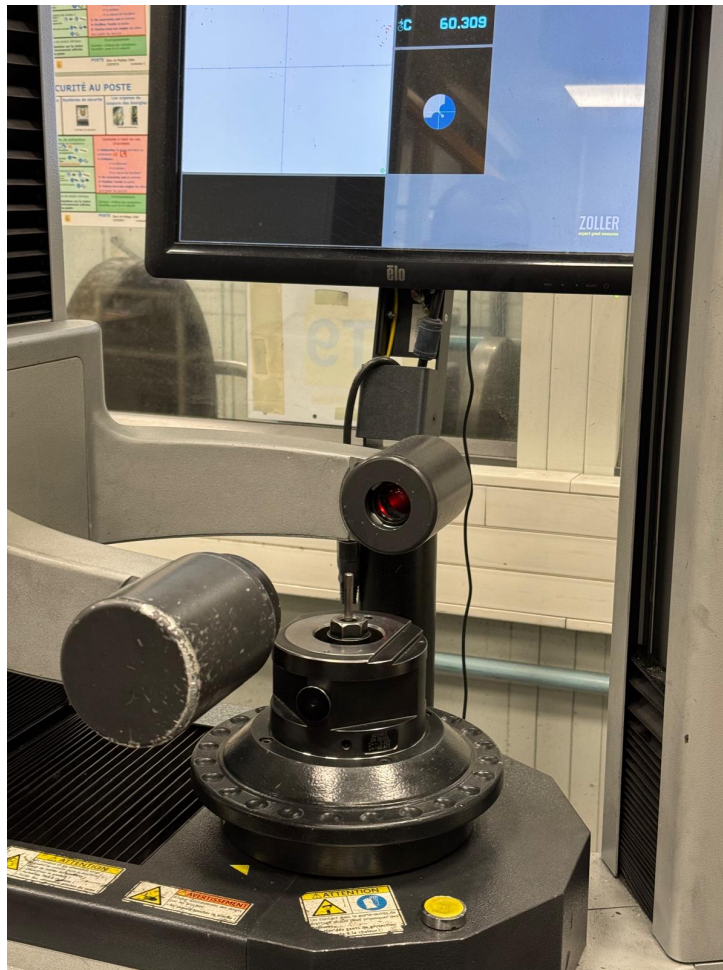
The Zoller optical presetting machine itself, whose screen is shown in the previous image: the measuring head (camera) rotates around the tool, mounted on the turntable at the base.
